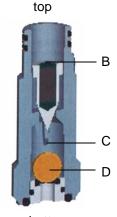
Detail: installation location of check valve housing Figure 4 Cross-section of check valve-housing
